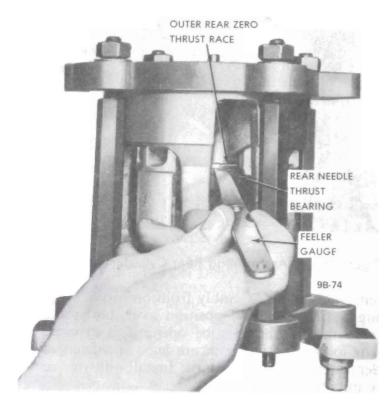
B-85 Gaging Clearance Between Rear Needle Thrust Bearing and Outer Rear Thrust Race
